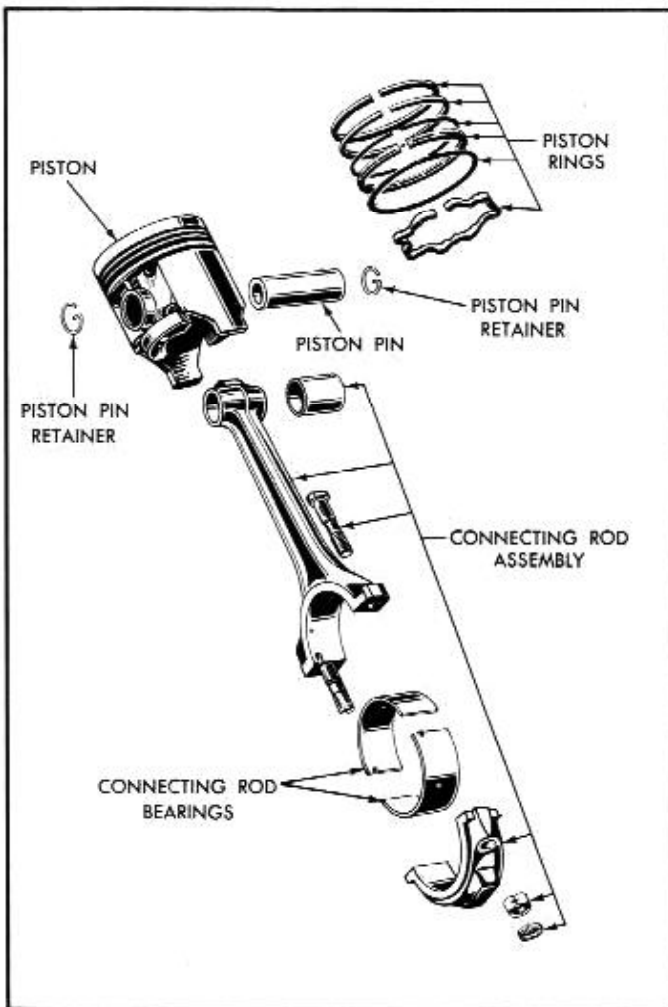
C-104—Pistons and Connecting Rod Assembly — Typical
